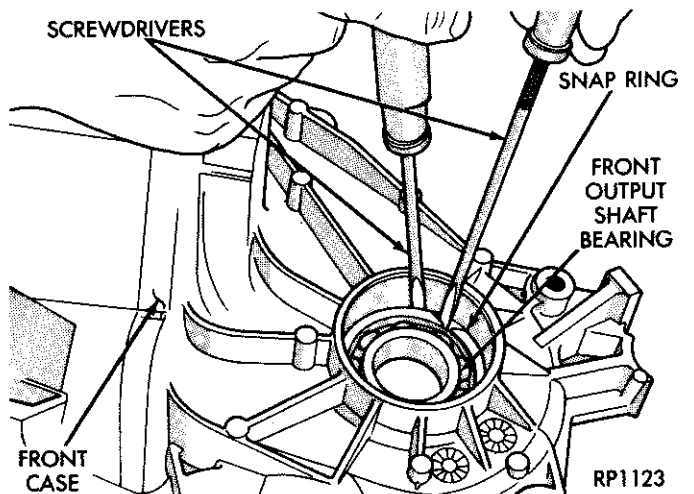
Removing/Installing Front Output Shaft Bearing Snap Ring
